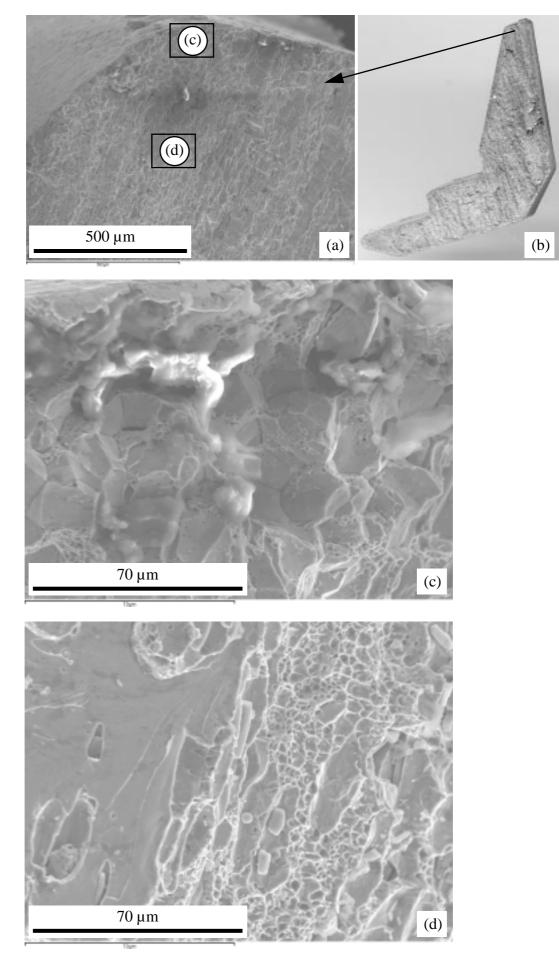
Fracture surfaces of the crack in the spring seat of the cylinder 4 (fig. 2g). SEM.
